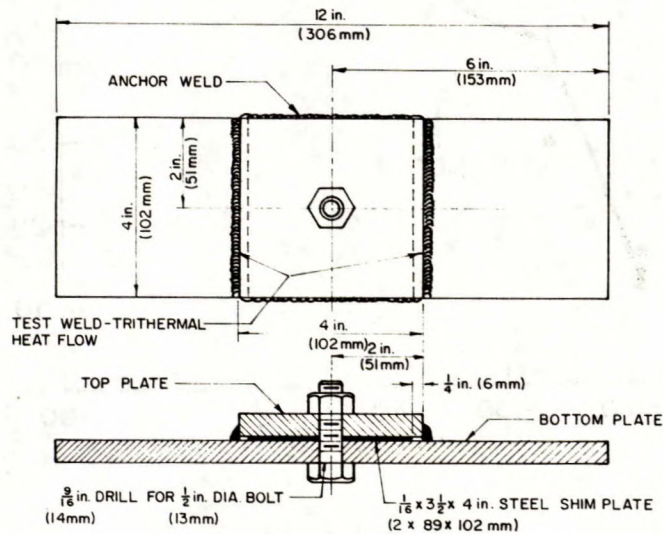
Controlled Thermal Severity (CTS) weldability specimen.
